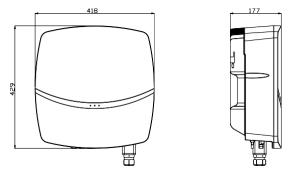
Dimensions of R5-(7K, 8K)-S2-15
